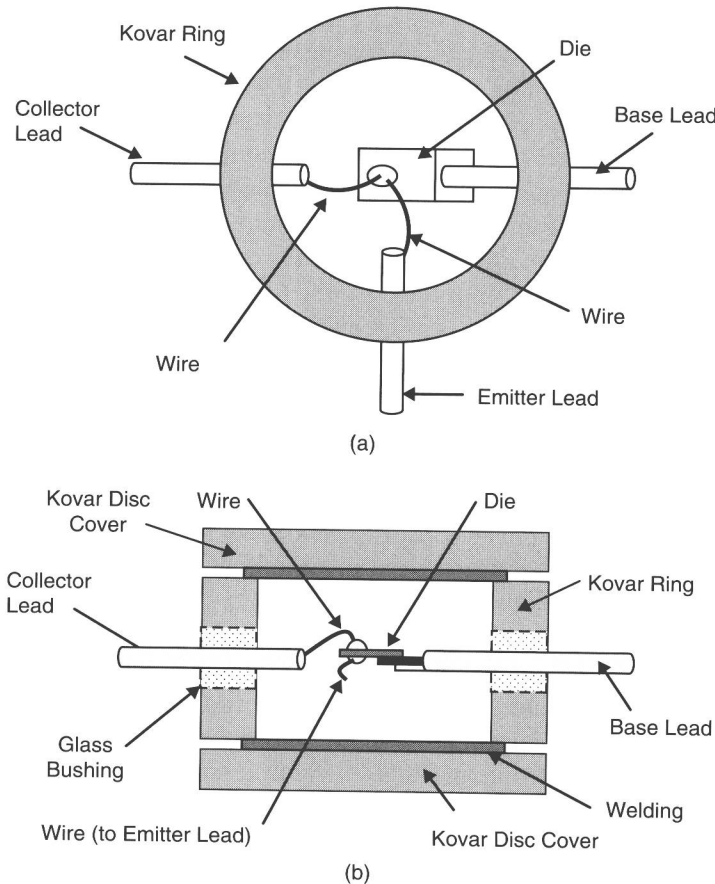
Kovar transistor package: (a) top view; (b) side view [2].
